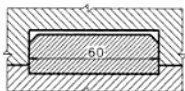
Hatching of adjacent parts and dimensioning.
